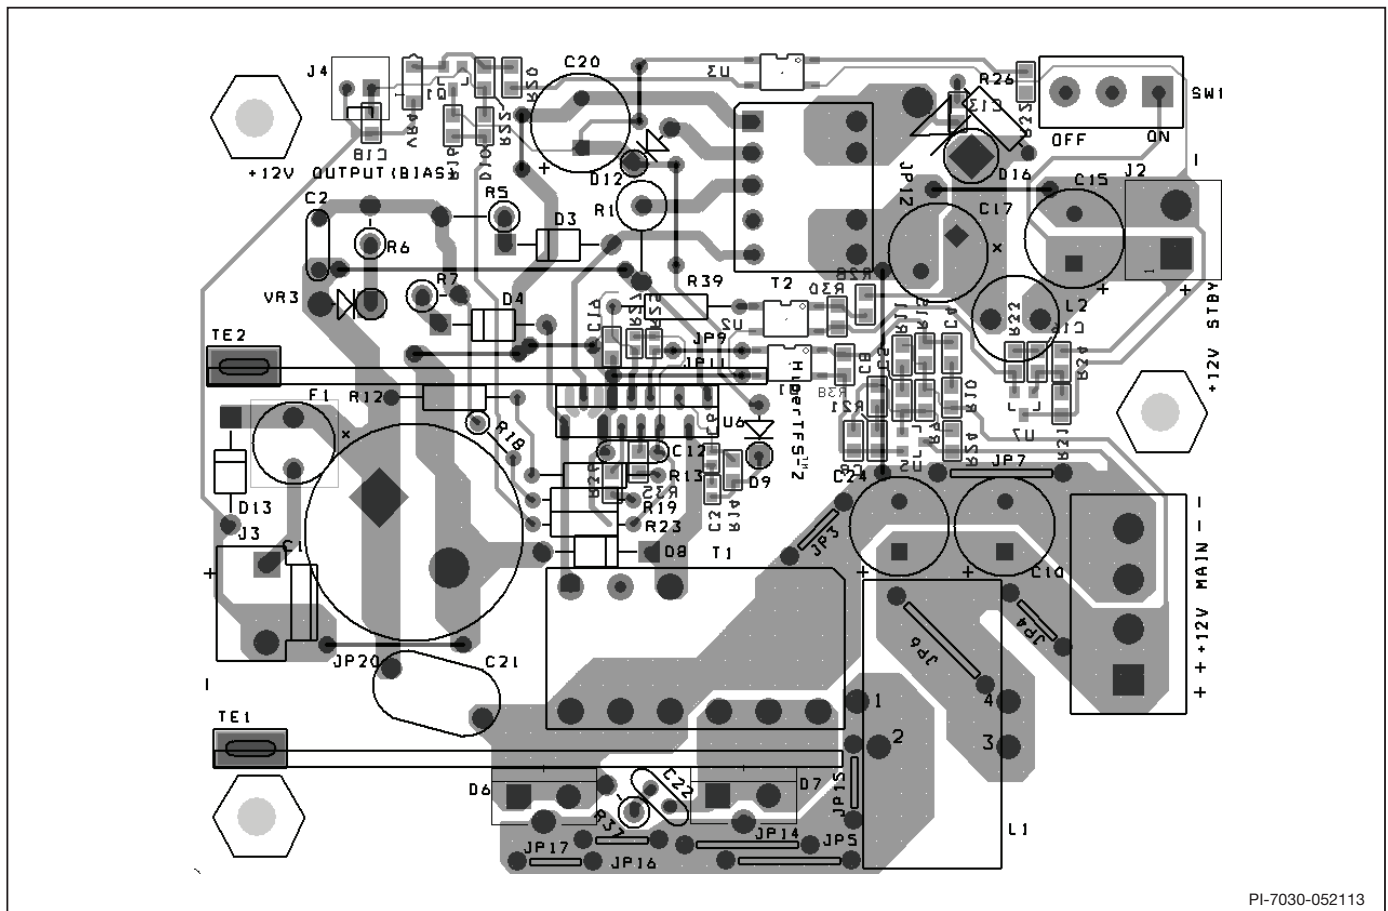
PCB Layout of Design Example Schematic in Figure 30.
